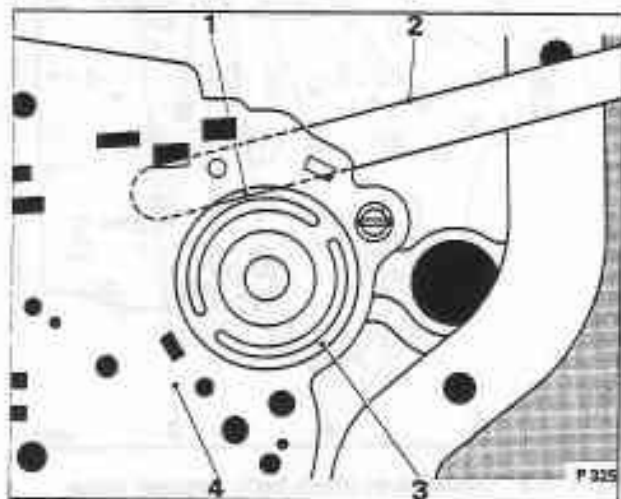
Method of temporarily holding front servo piston in position (transmission in car)
